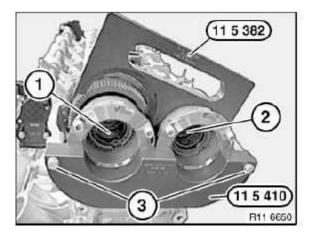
Identifying Special Tool 11 5 410 And 11 5 382 Courtesy of BMW OF NORTH AMERICA, INC.
